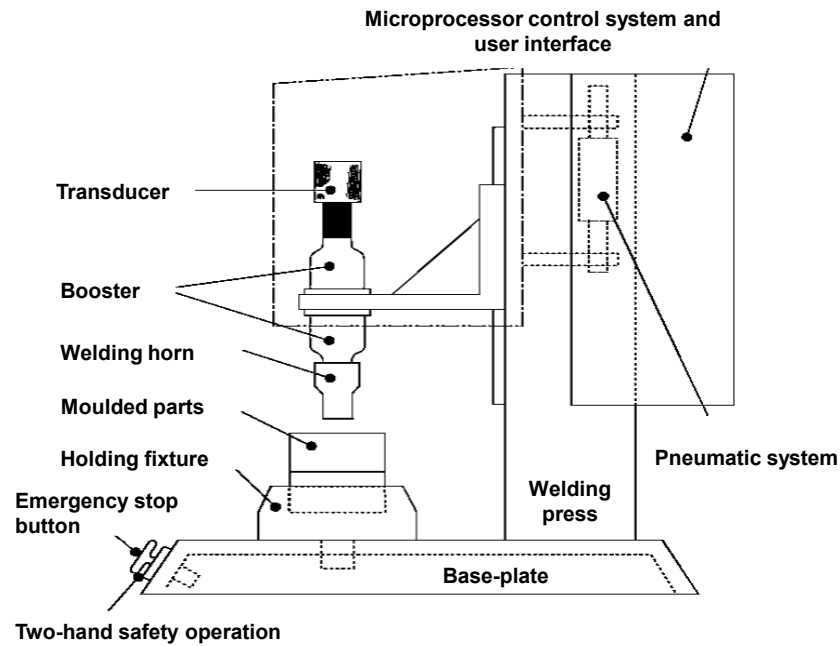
Substance-to-substance connection methods for smart textiles: Ultrasonic welding [41].
